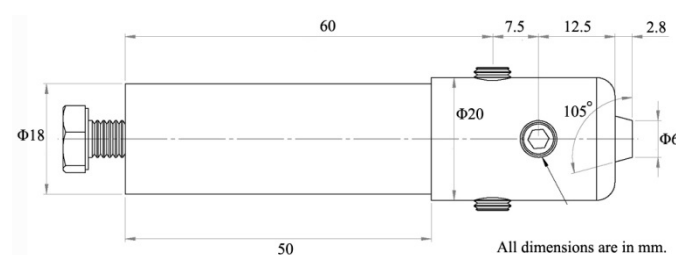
Schematic design and geometry of the tool used for FSW and FSVW processes.
